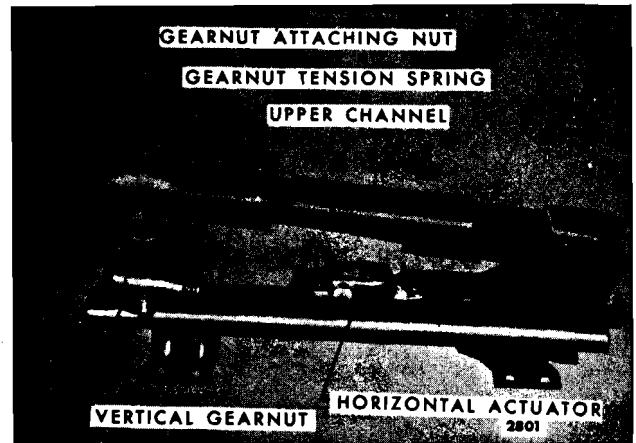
Four-Way Seat Adjuster - Buick "B, C & E" Styles
